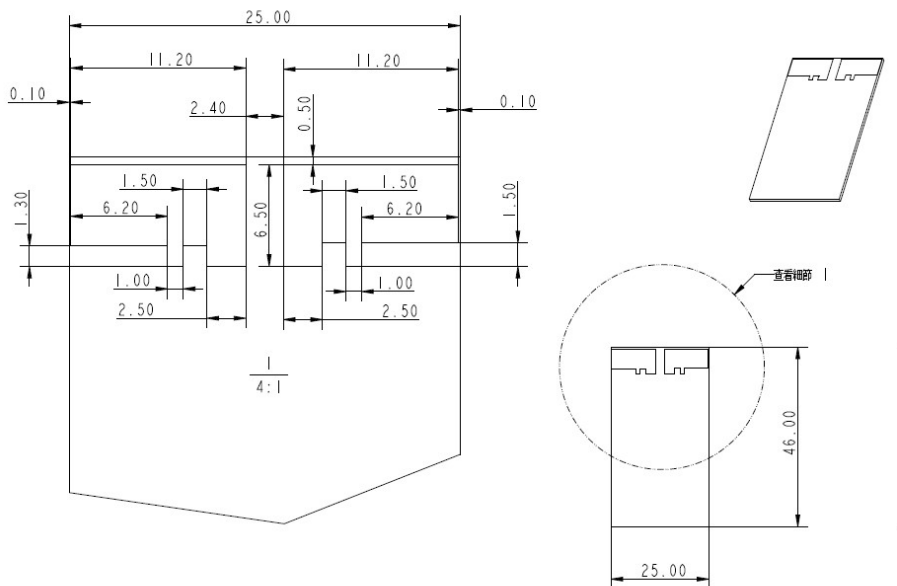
Mechanical Drawing of 5G_MODULE_FPC Module with shielding case
